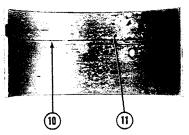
Typical Defective Bearings rs or Pockets 7. Overlay Worn Out
